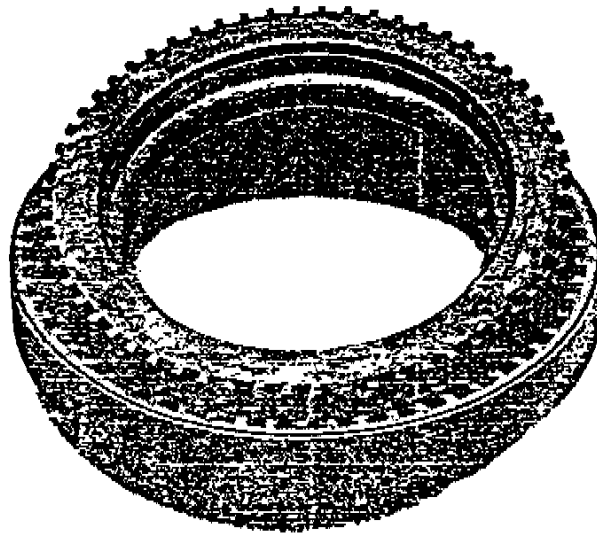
Wheel Speed Sensor with Multi-toothed Rotor and Stator [6.2].
